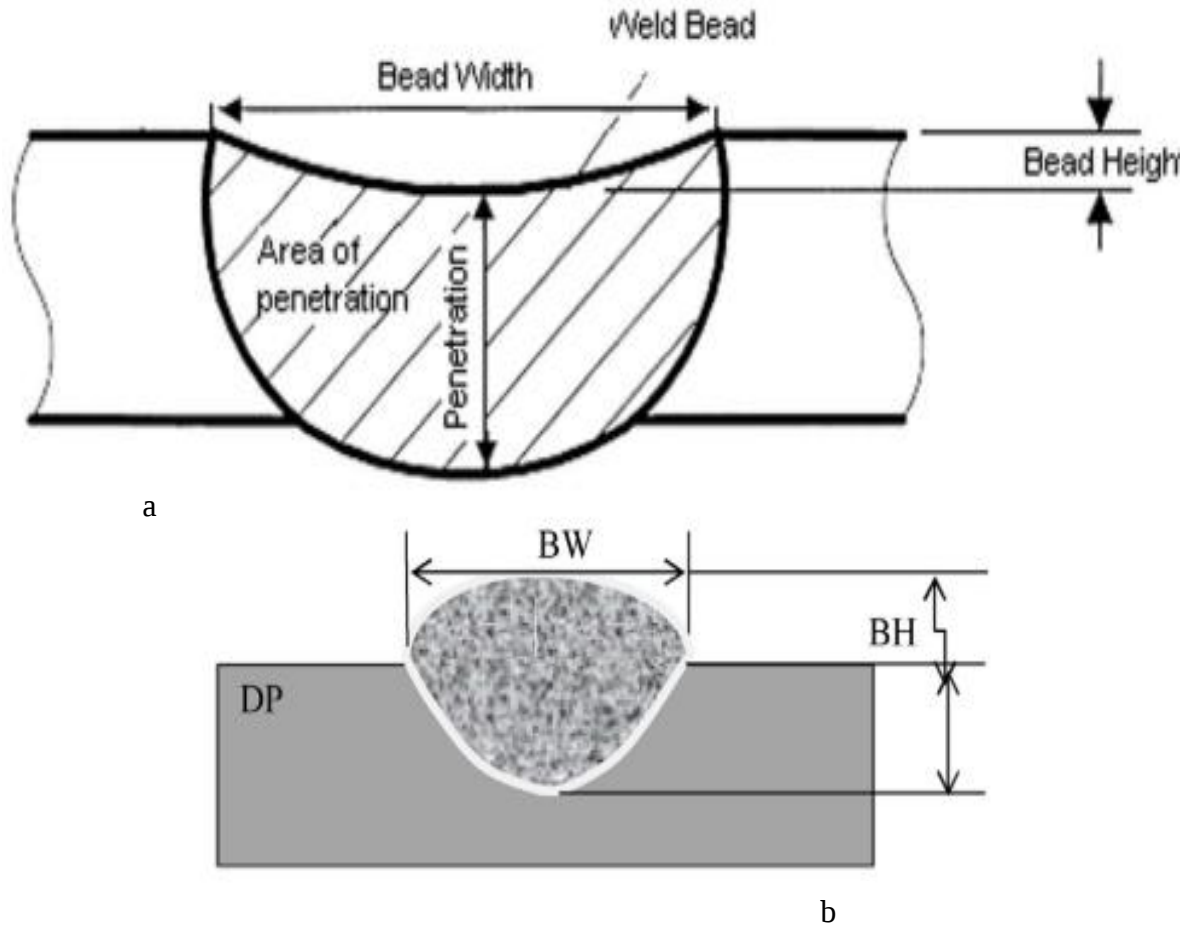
Weld bead geometry(Srivastava & Garg, 2017b)
